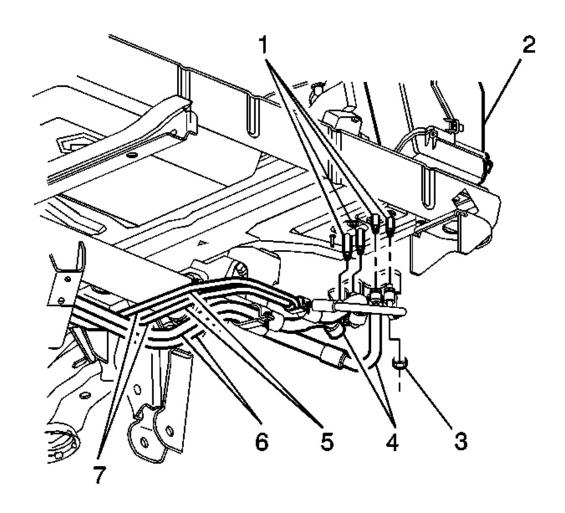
Identifying Auxiliary HVAC Assembly Tubes, Hoses & Fasteners Courtesy of GENERAL MOTORS CORP.
